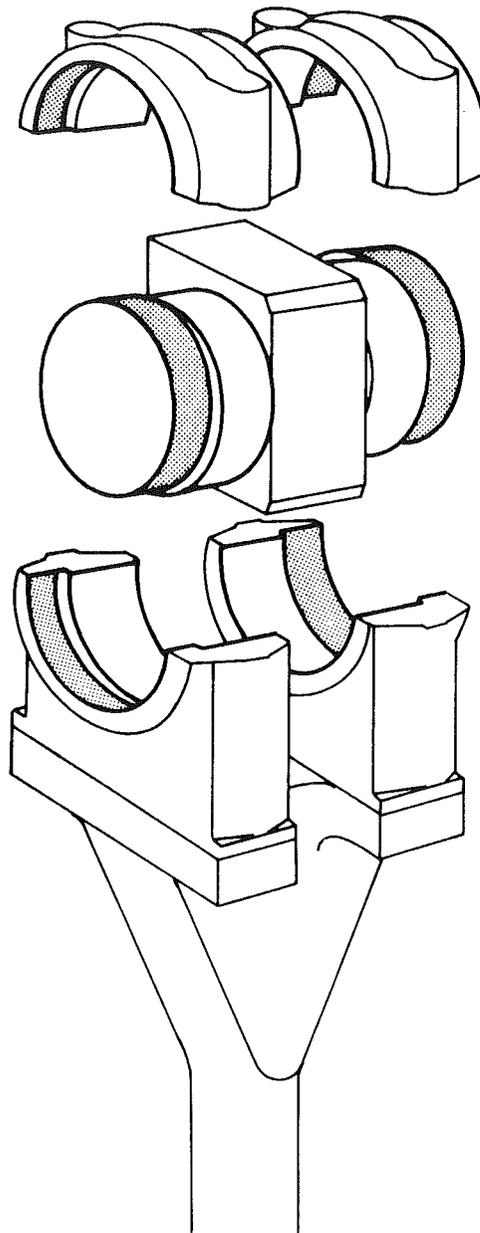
Offset bearing applied to crosshead of GMT 1060 engine (After Ciliberto and Mariani [1977])
